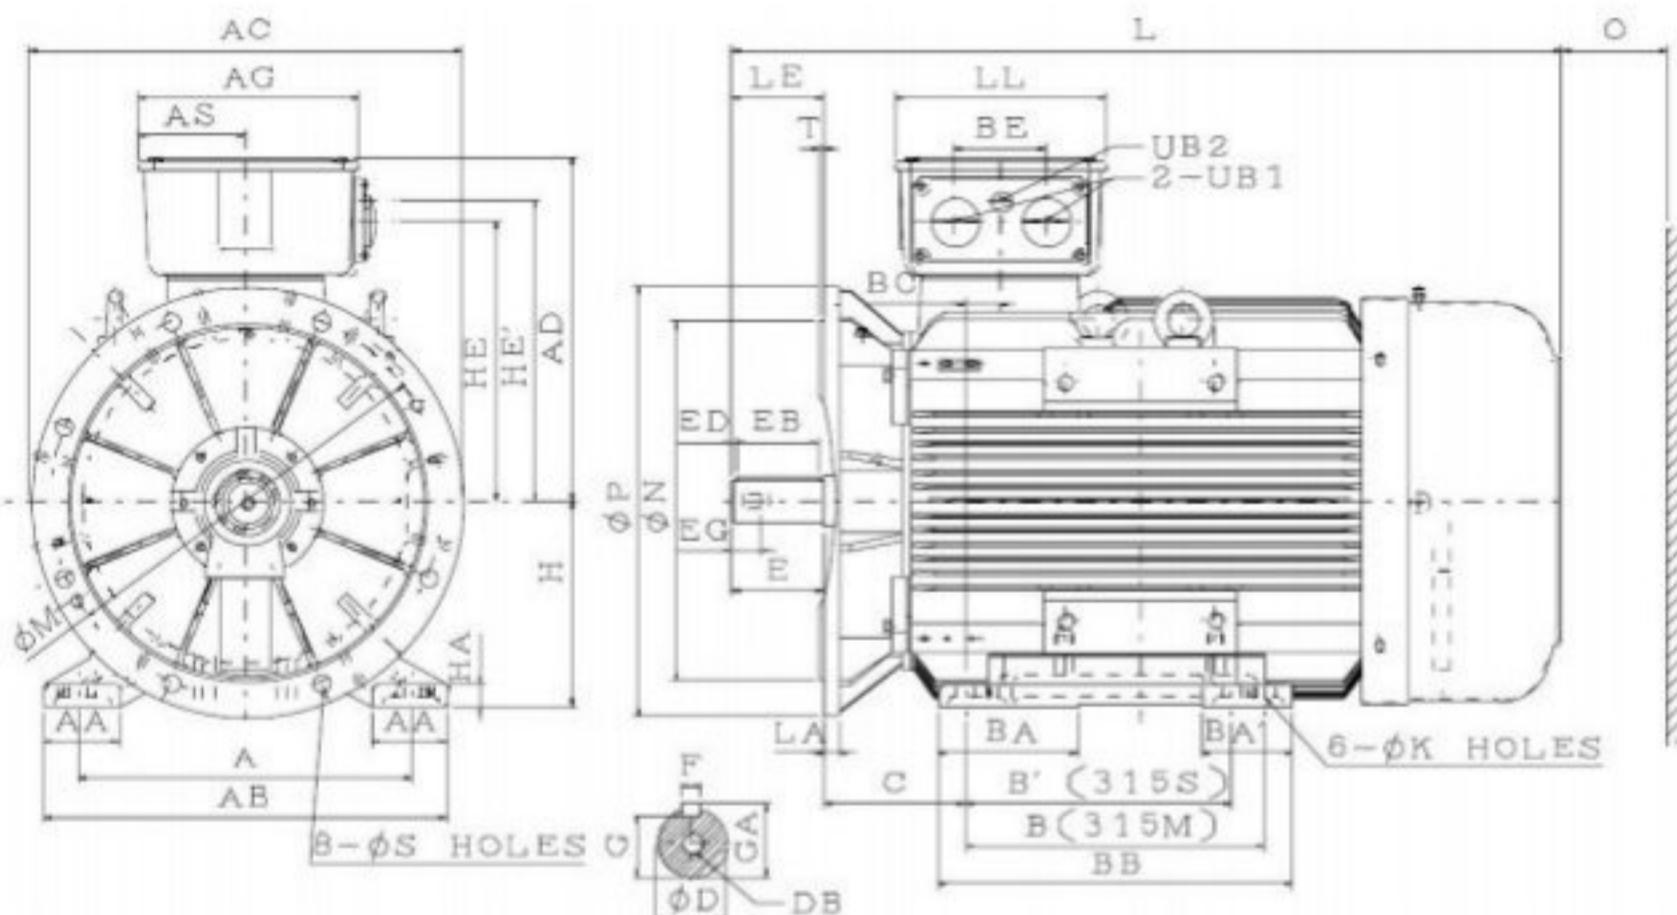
Outline drawing of cast iron design, mounting B35; frame size 315S – 315M
